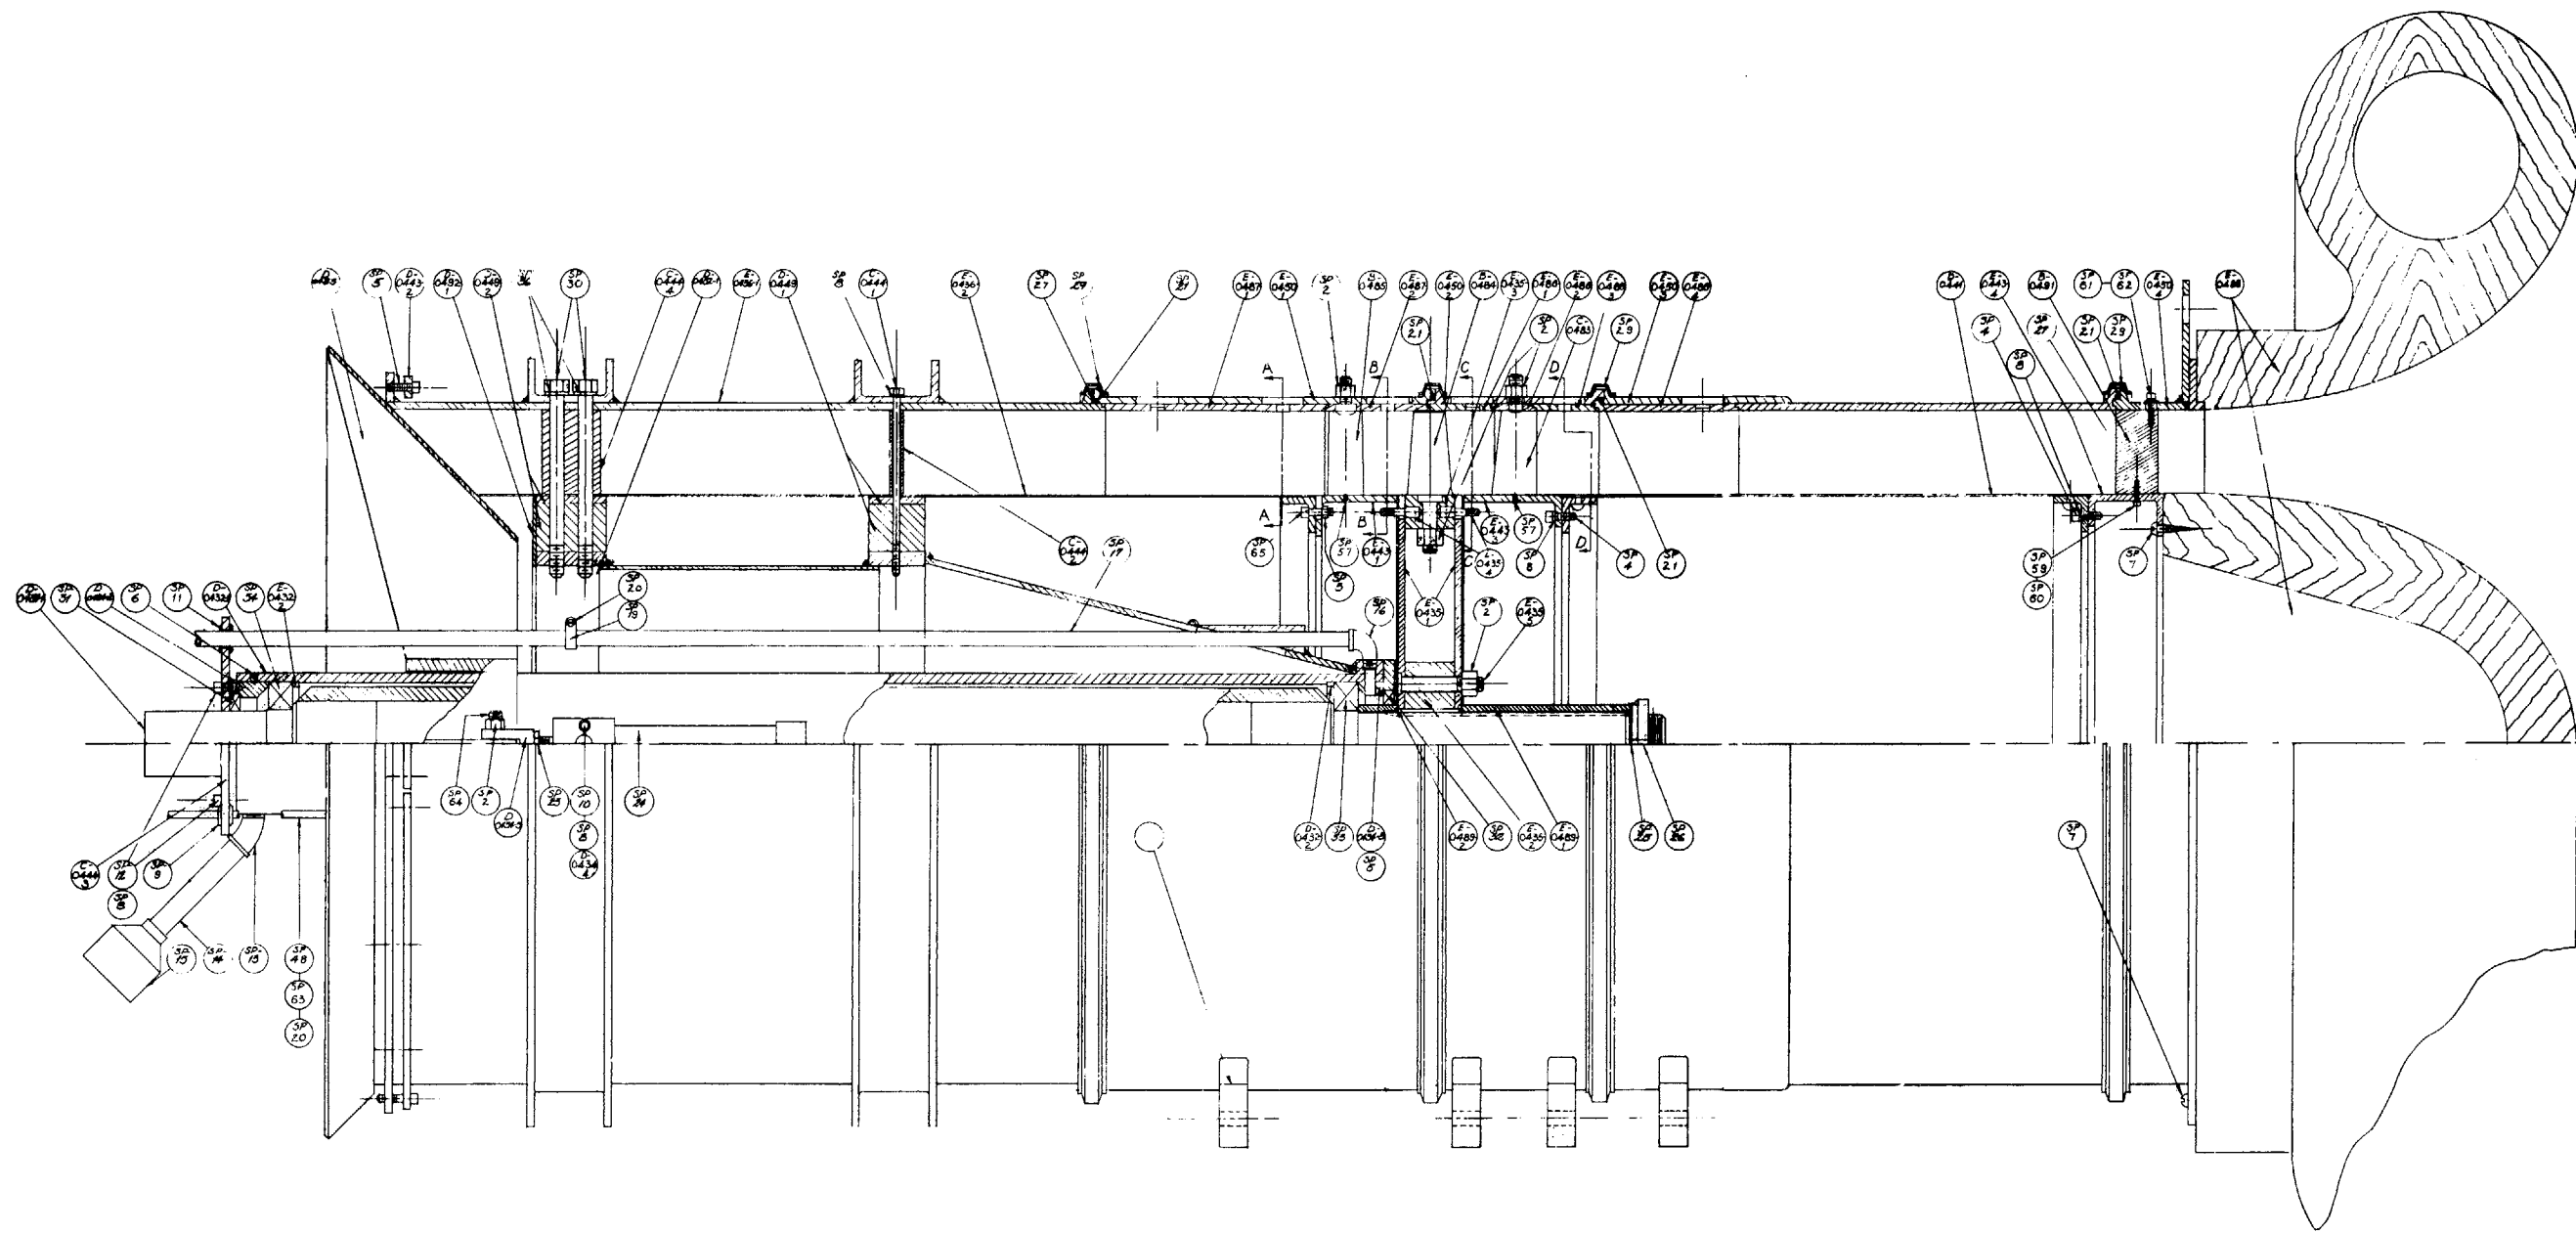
SECTIONAL DRAWING OF COMPRESSOR
